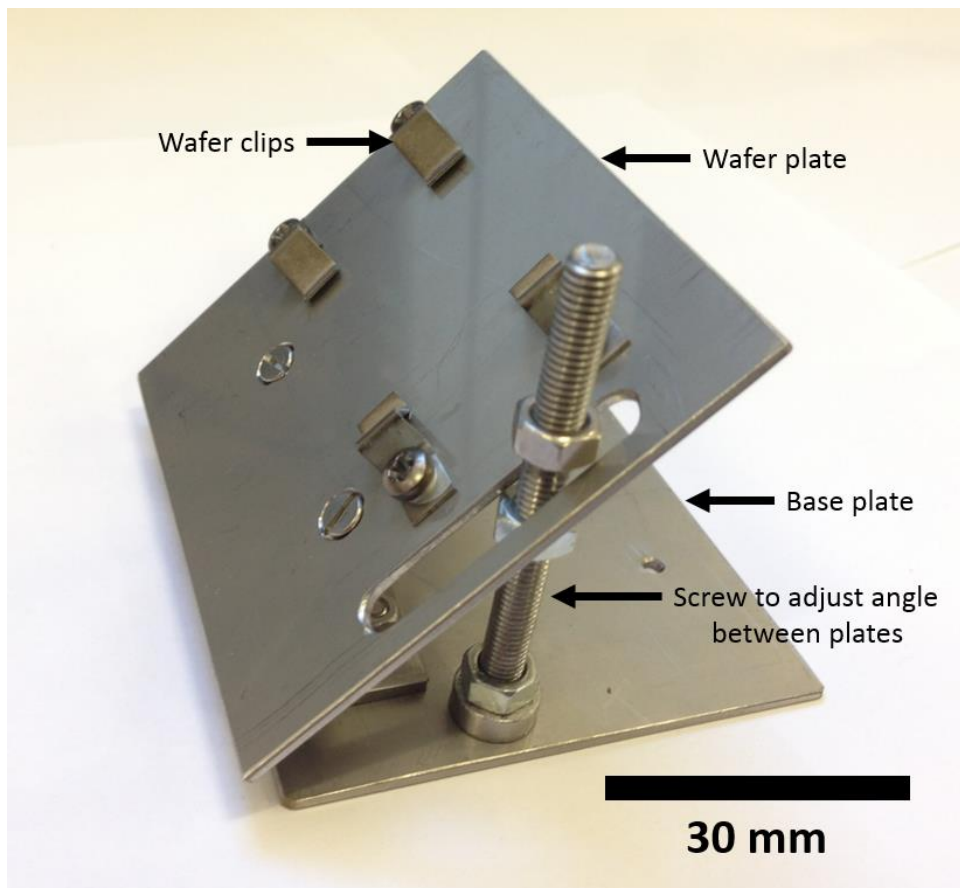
Photograph of the angle jig used to fabricate the ledge overhang structures.
